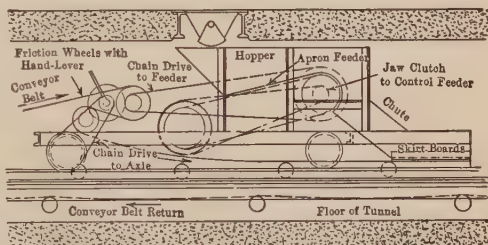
Traveling Hopper with Feeder Taking Power from the Conveyor Belt.
